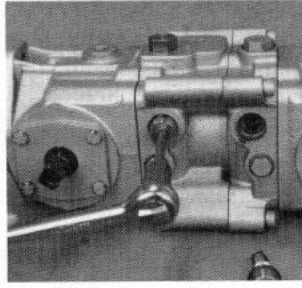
Install Spacer Ring and O-Ring in Housing
